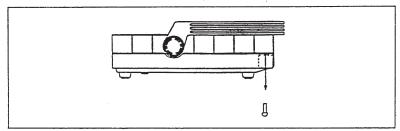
Removing the Screw from the Bottom of This Multimeter
